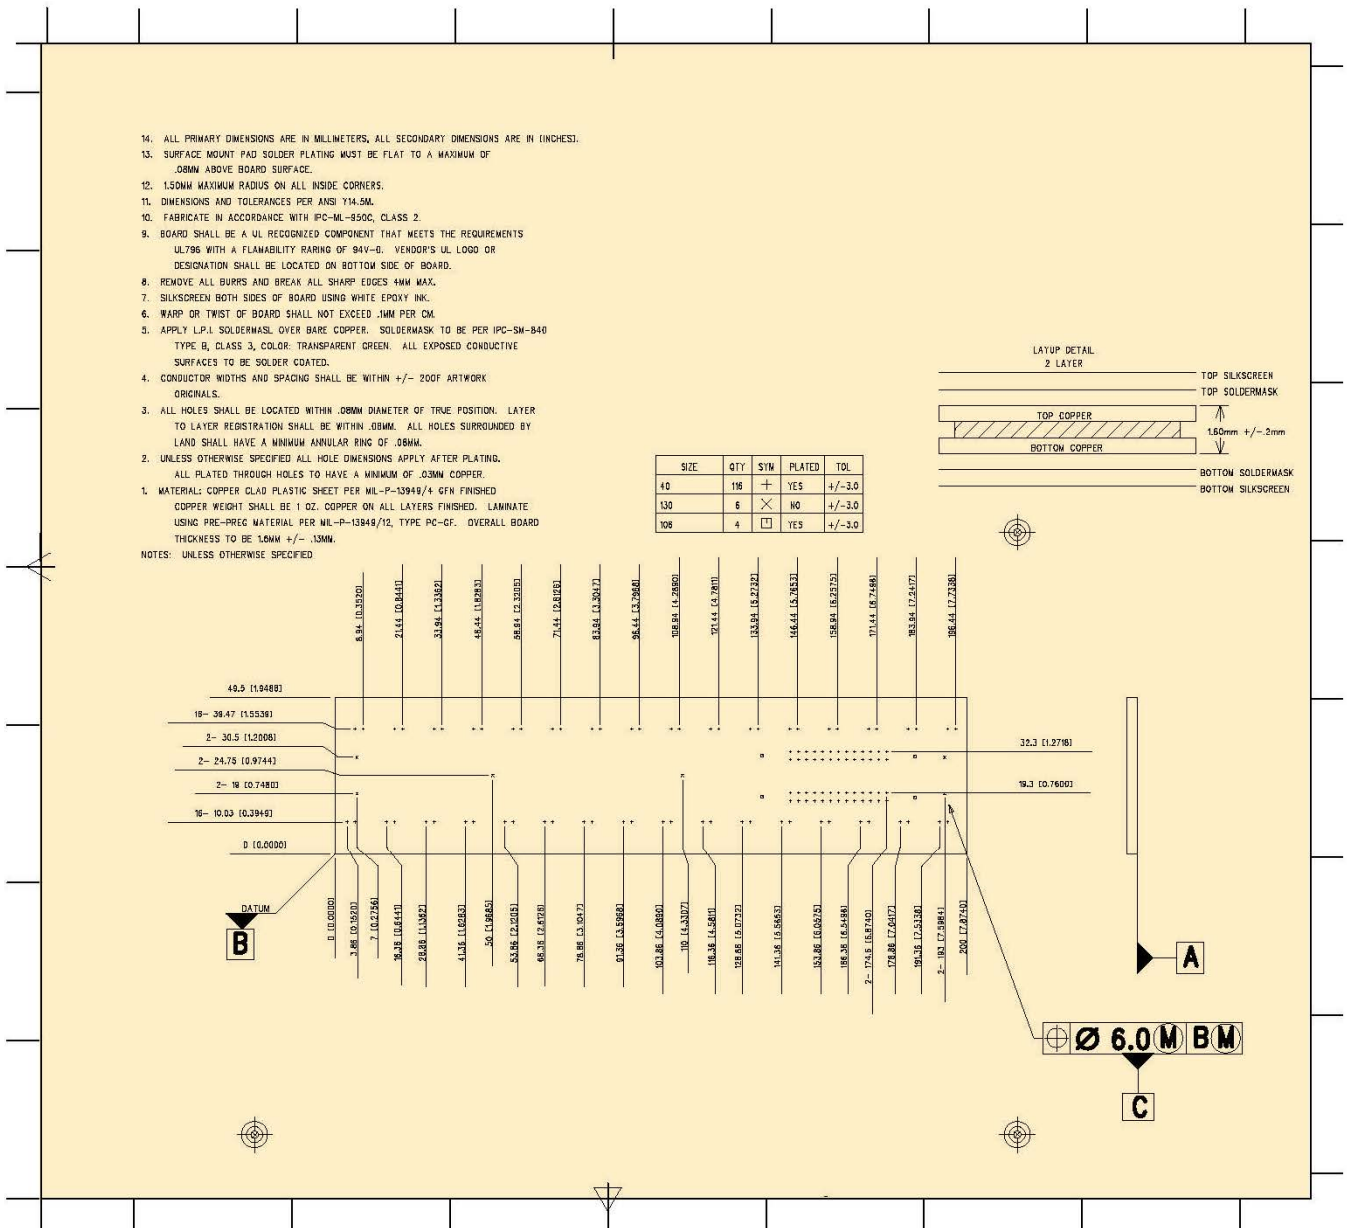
Datum points must be properly noted in fabrication and assembly drawings.
